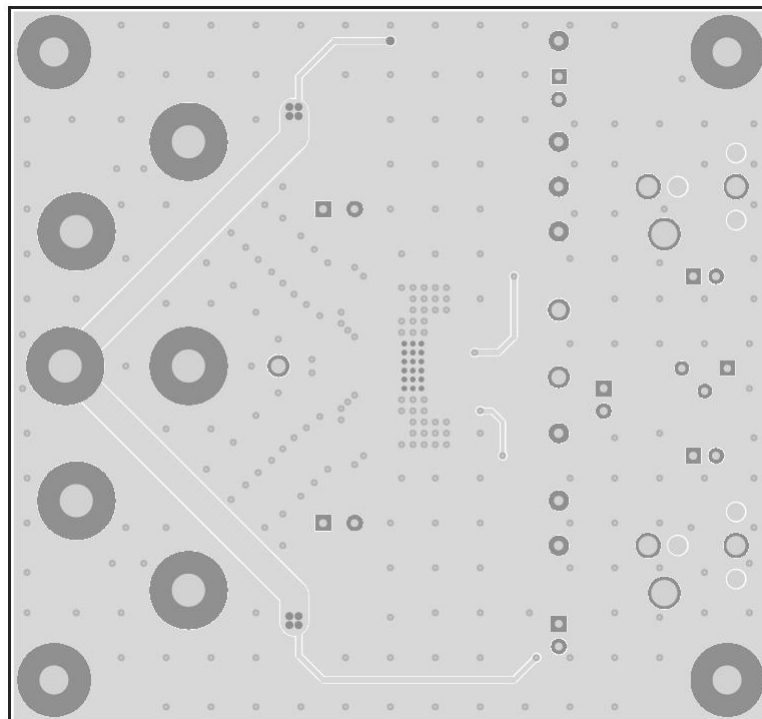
TPA3136D2EVM Bottom Composite Assembly
